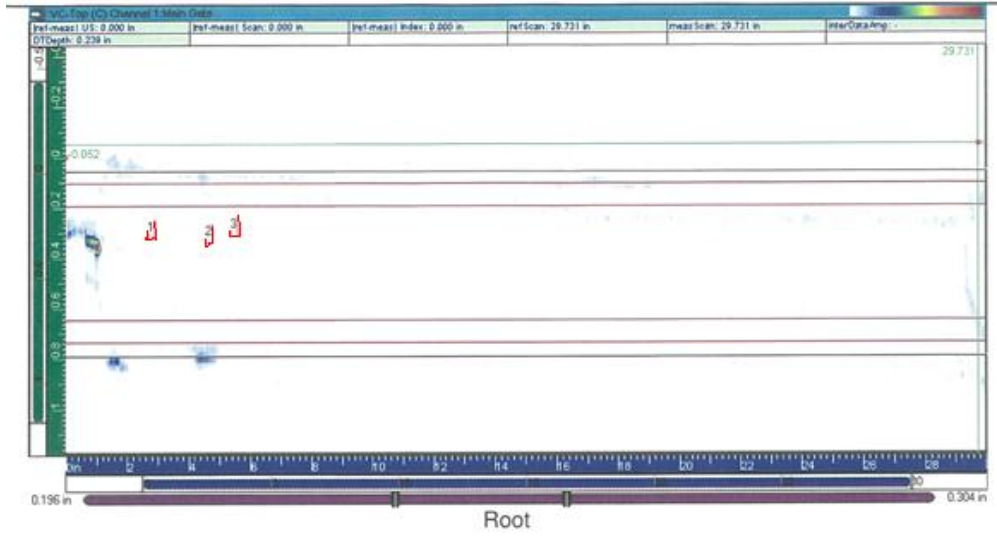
Phased array ultrasonic inspection output showing flaws in the root of the weld.
